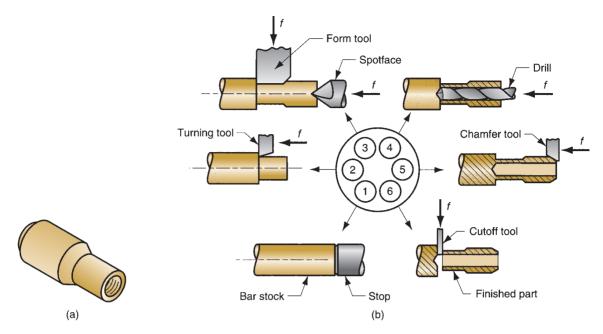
(a) Type of part produced on a six-spindle automatic bar machine; and (b) sequence of operations to produce the part: (1) feed stock to stop, (2) turn main diameter, (3) form second diameter and spotface, (4) drill, (5) chamfer, and (6) cutoff.
